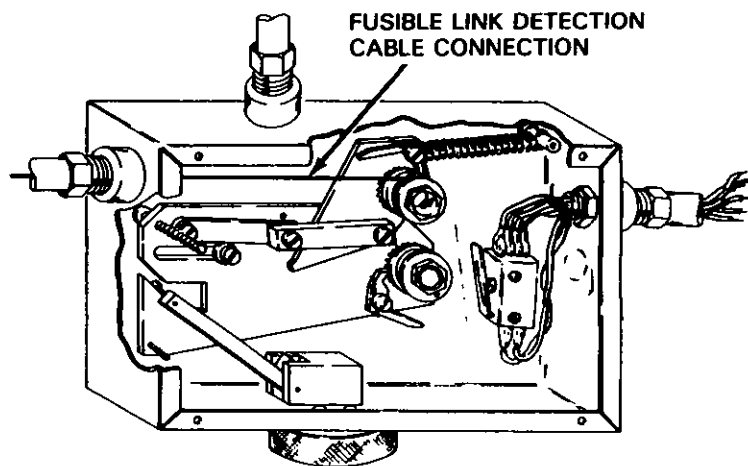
Mechanical Control Head with Electrical Miniature Switch (Double Pole-Double Throw)
